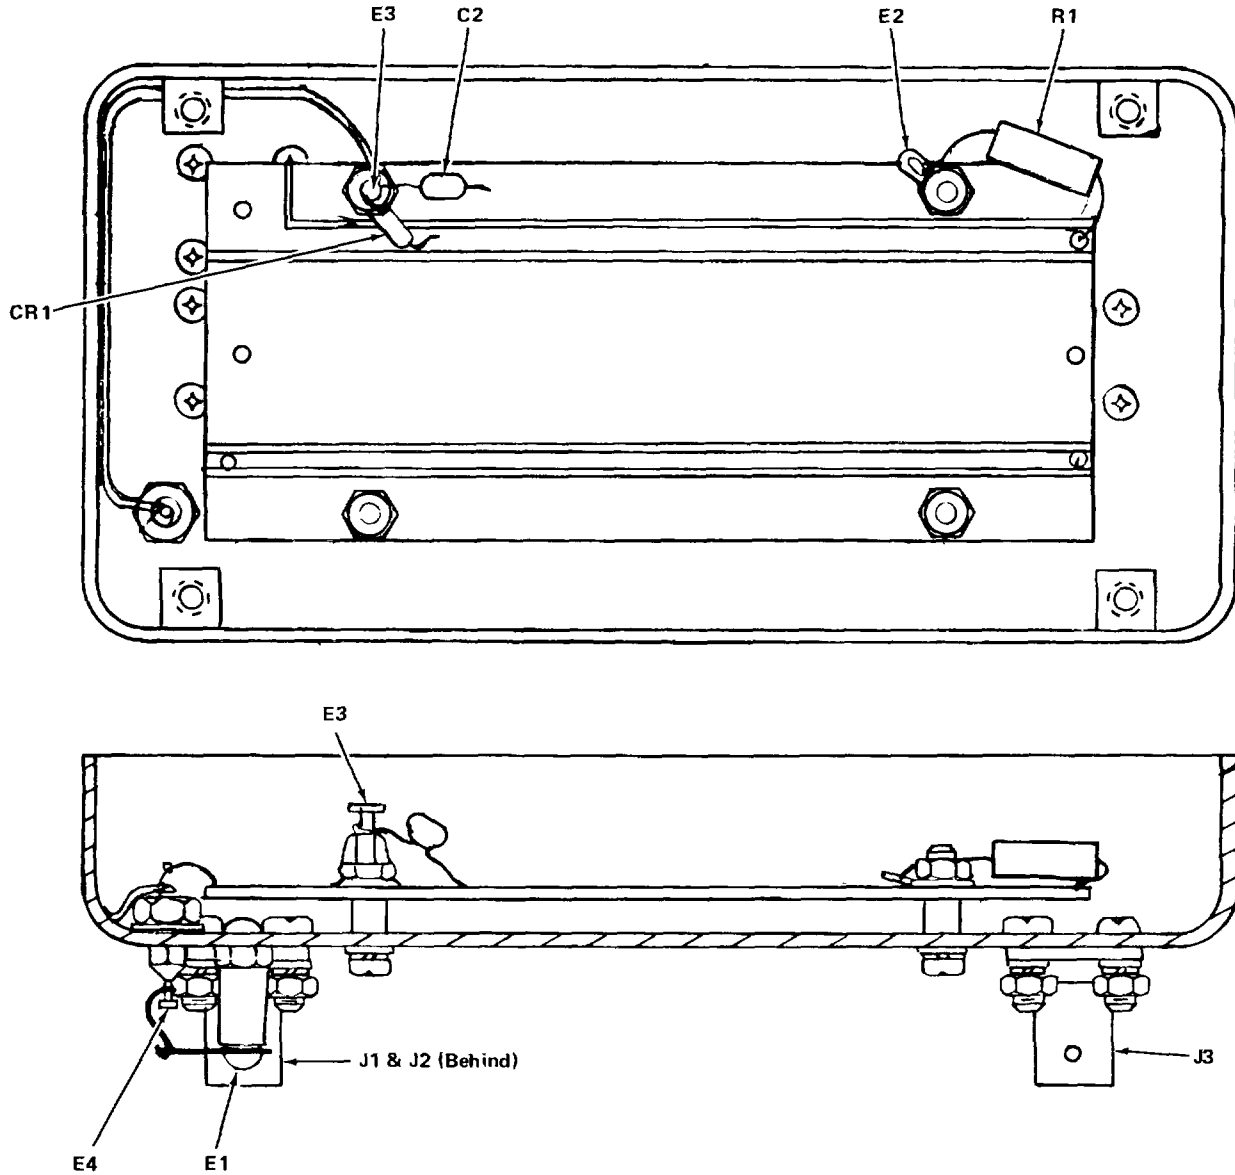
Directional Coupler, 1A4DC1 Parts Location Diagram
